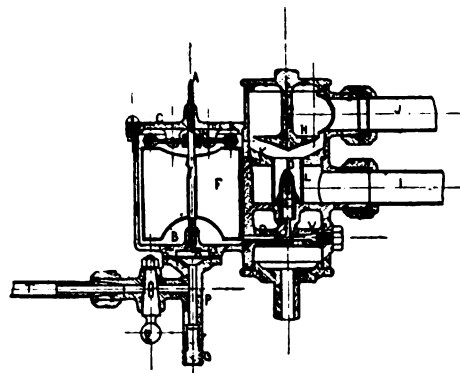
SECTION OF ROCHET CARBURETTOR.
